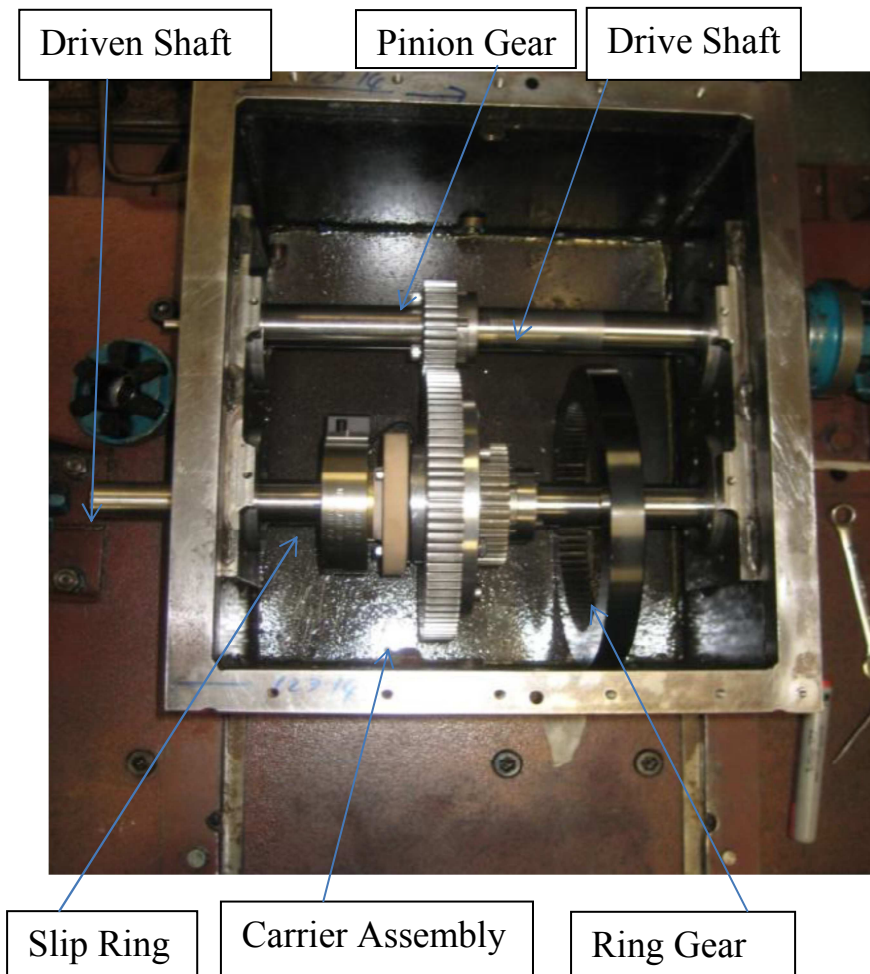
University of New South Wales Planetary Gearbox during assembly
